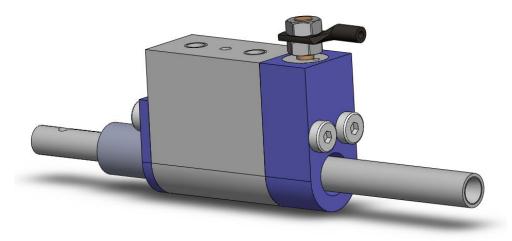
The housing for the carbon brush bolted to the bearing housing with a cable lug connected to it.
